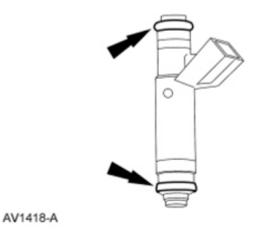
Locating Fuel Injectors O-Rings Courtesy of FORD MOTOR CO.
